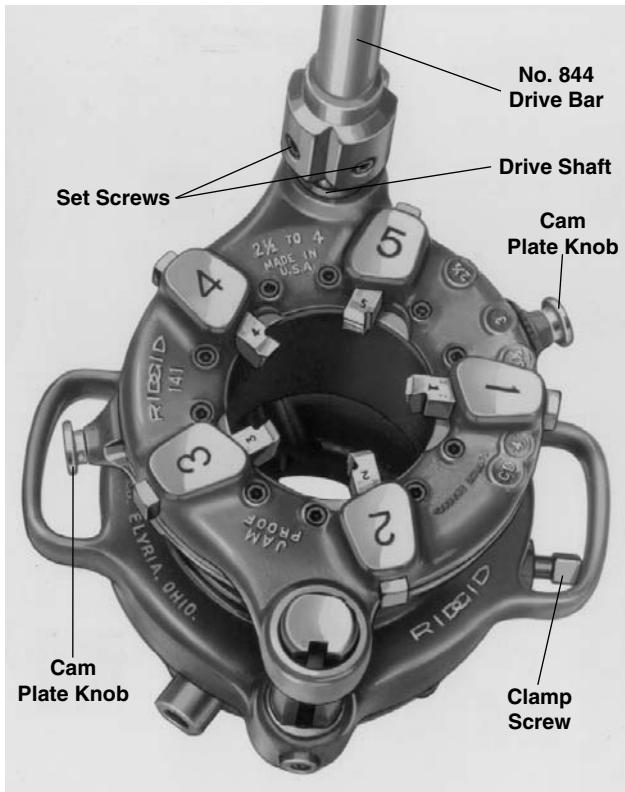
No 141 Geared Threader (No. 161 Threader Similar)
